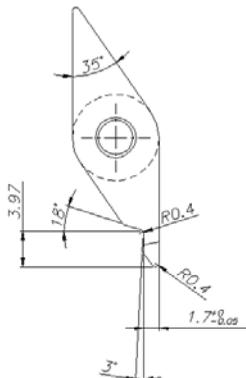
Schematic illustration of the special insert with a brazed PCBN-L tip
